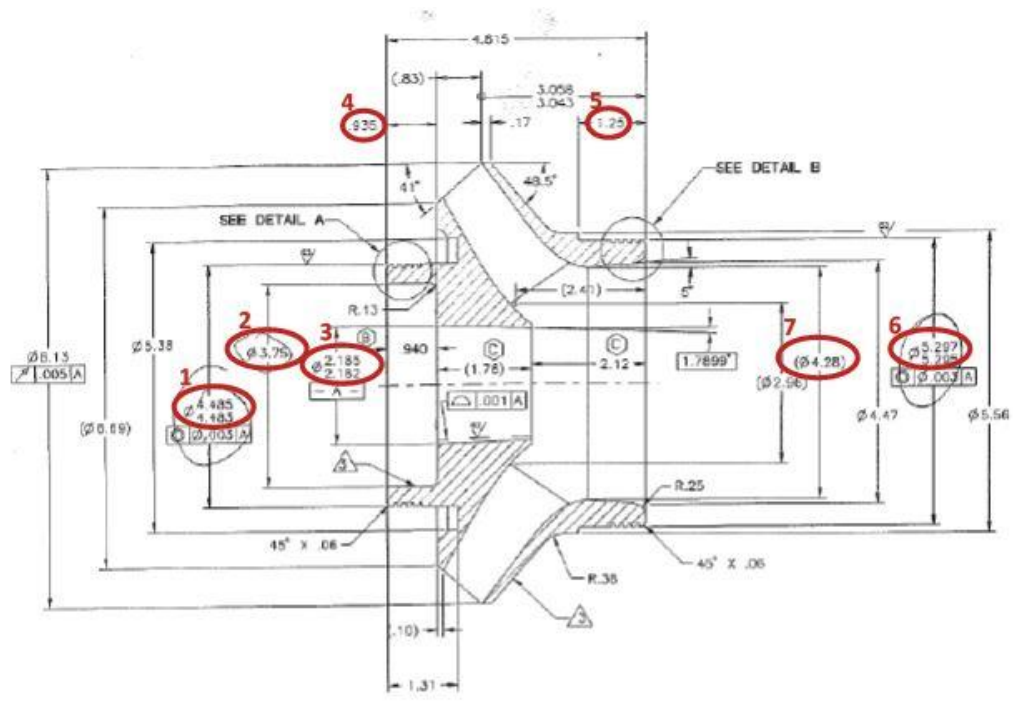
Dimensions of the impeller of WJE-1000 [15]
